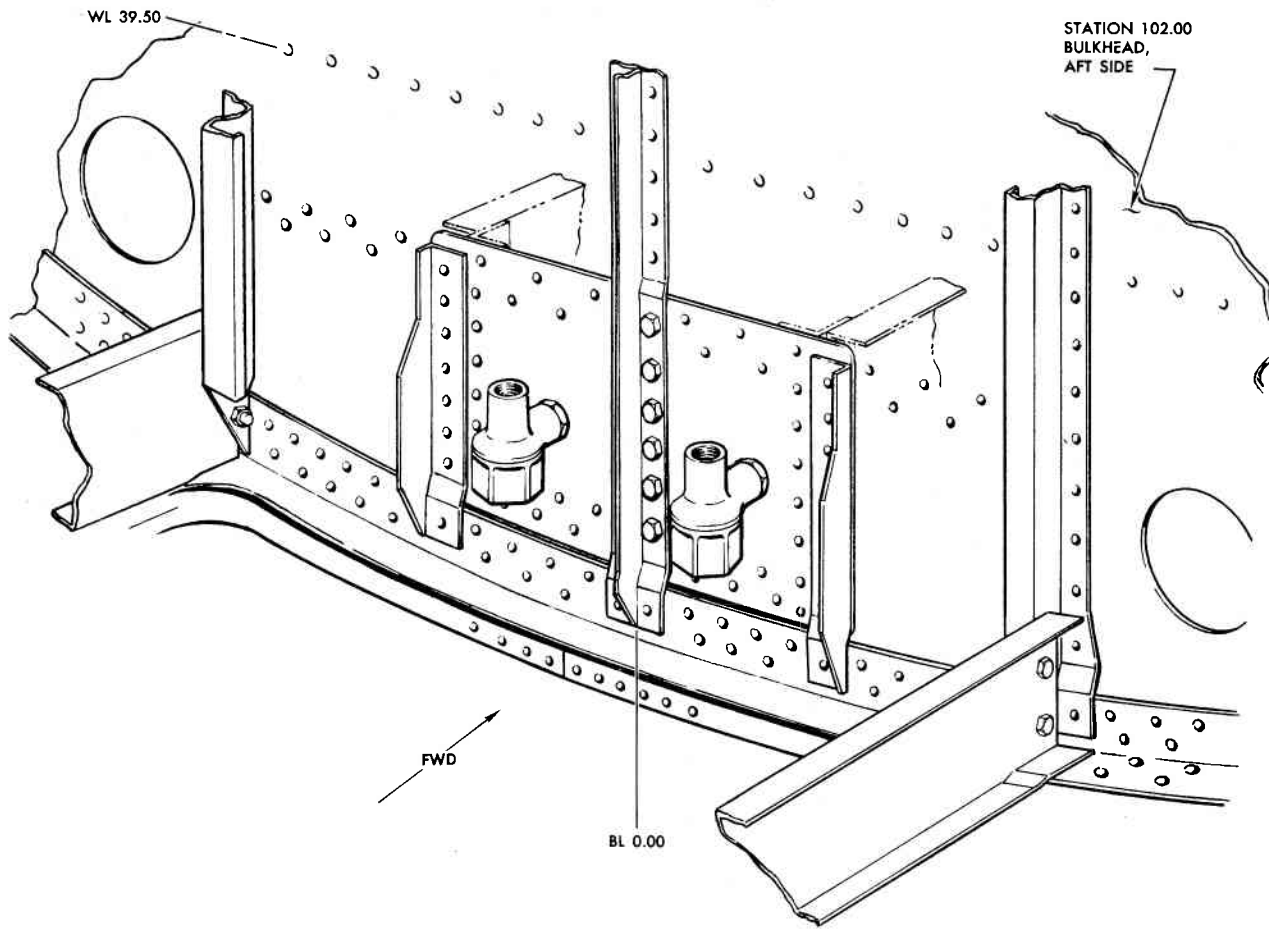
Airspeed Tubing Drain Trap Installation Repair—Station 102.00 Bulkhead (Sheet 2 of 3)
